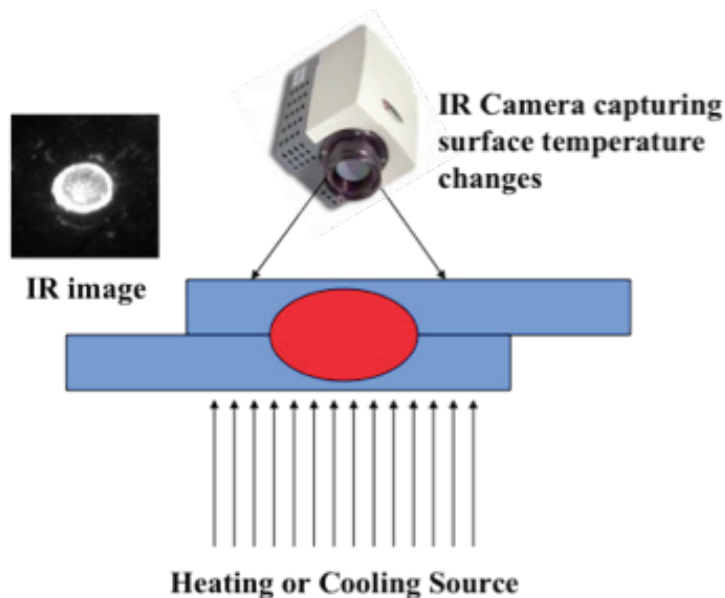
IR weld quality inspection principle (post-mortem approach).
